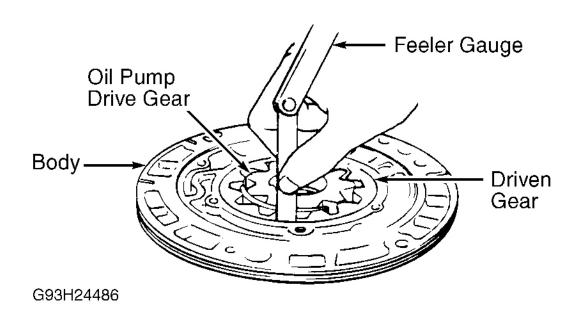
Checking Oil Pump Driven Gear Clearance Courtesy of SUZUKI OF AMERICA CORP.
